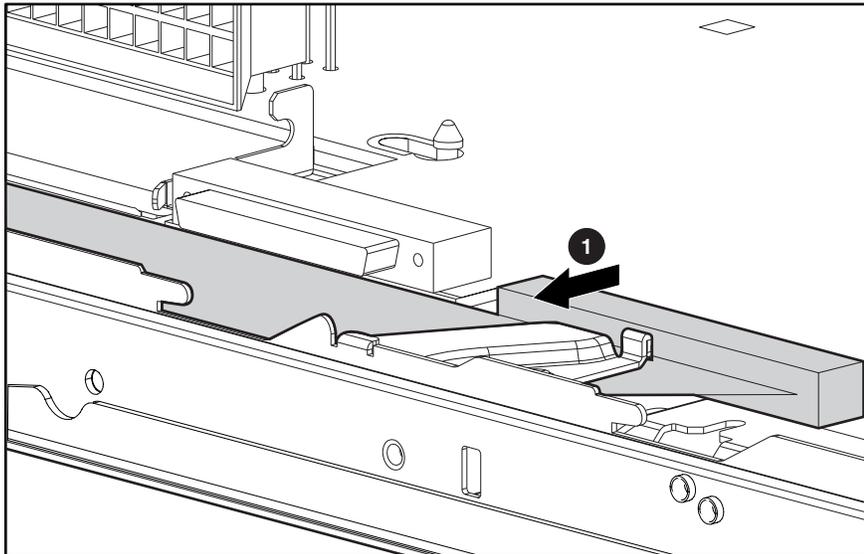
Disconnecting the 100-pin CD-ROM (DVD-ROM)/diskette drive assembly cable from the system board
